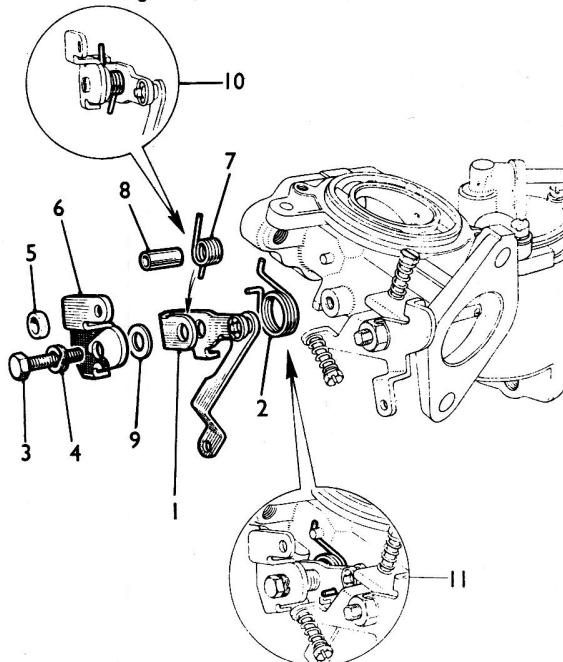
DISMANTLING THE HS6 CARBURETTOR - STAGE 4
